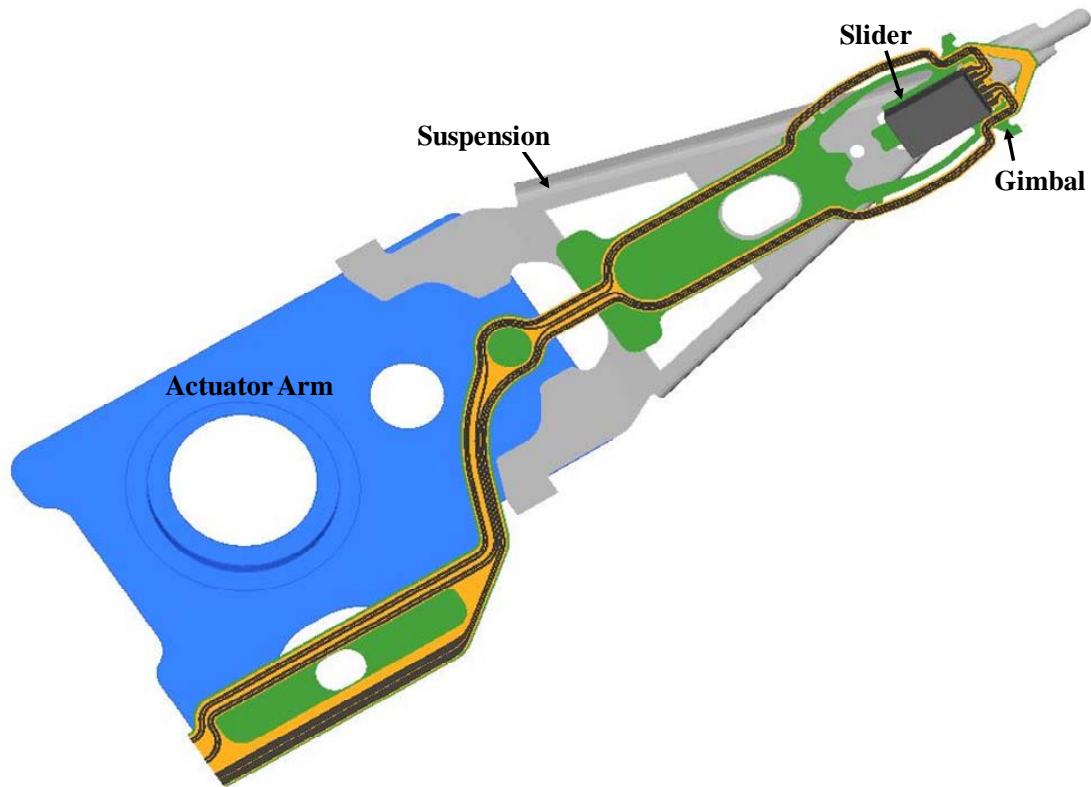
Schematic of head/gimbal assembly (HGA)
